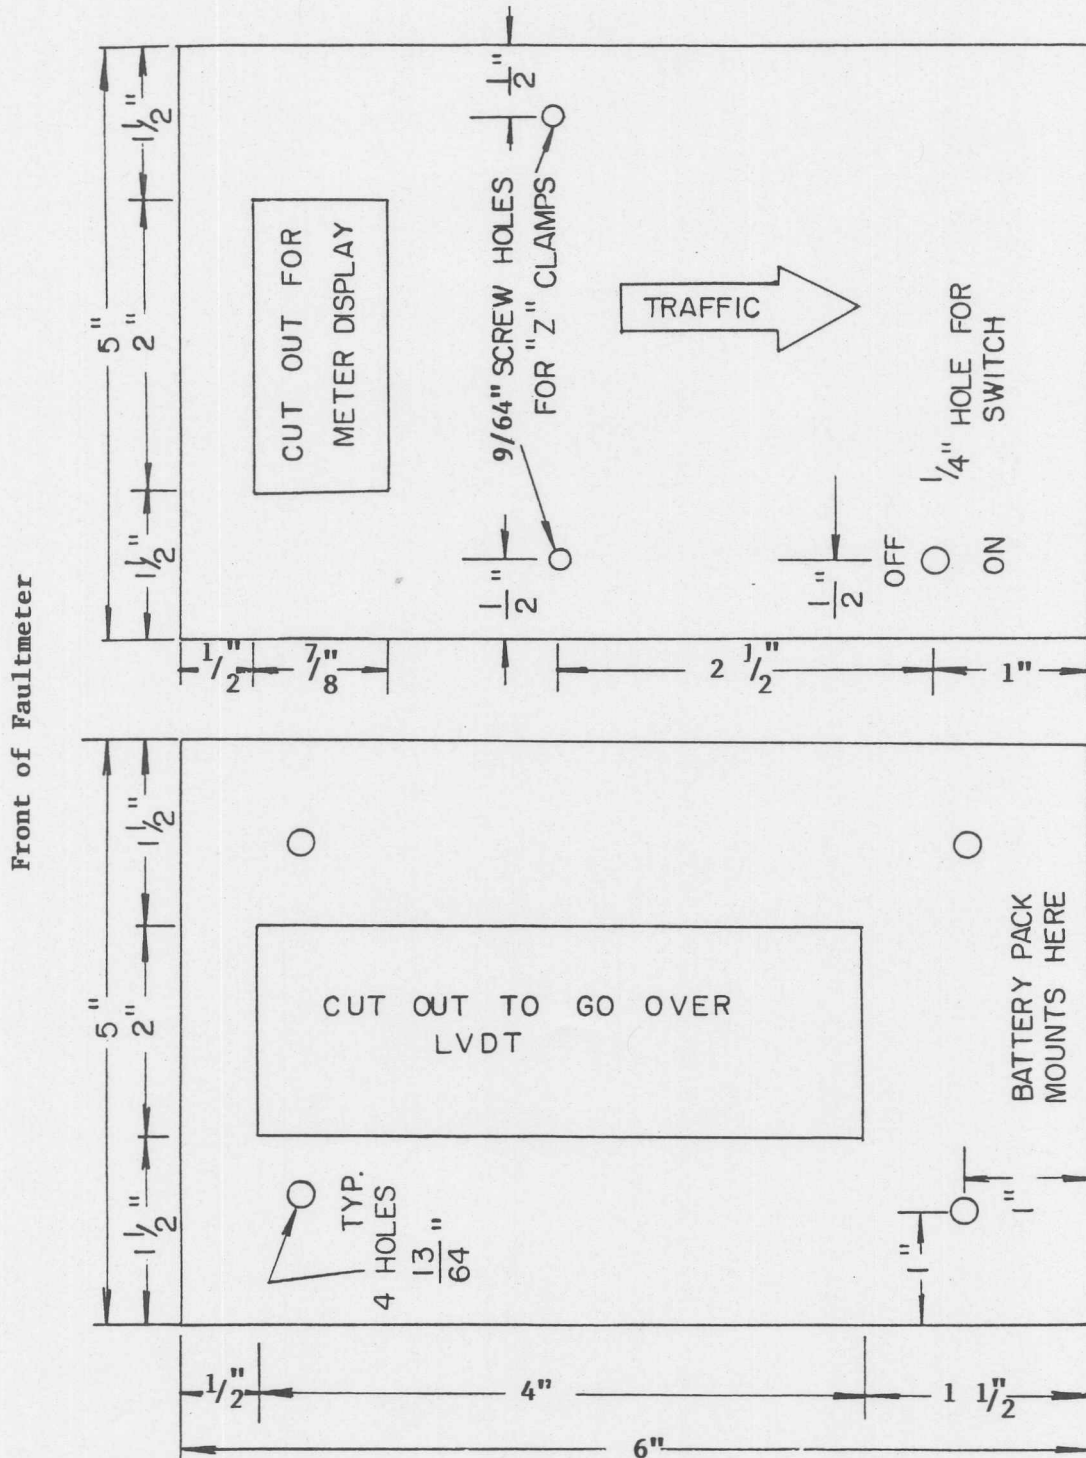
Drawing H-FM, Top and Bottom View of Electronic Cabinet (5" x 6" x 9")
